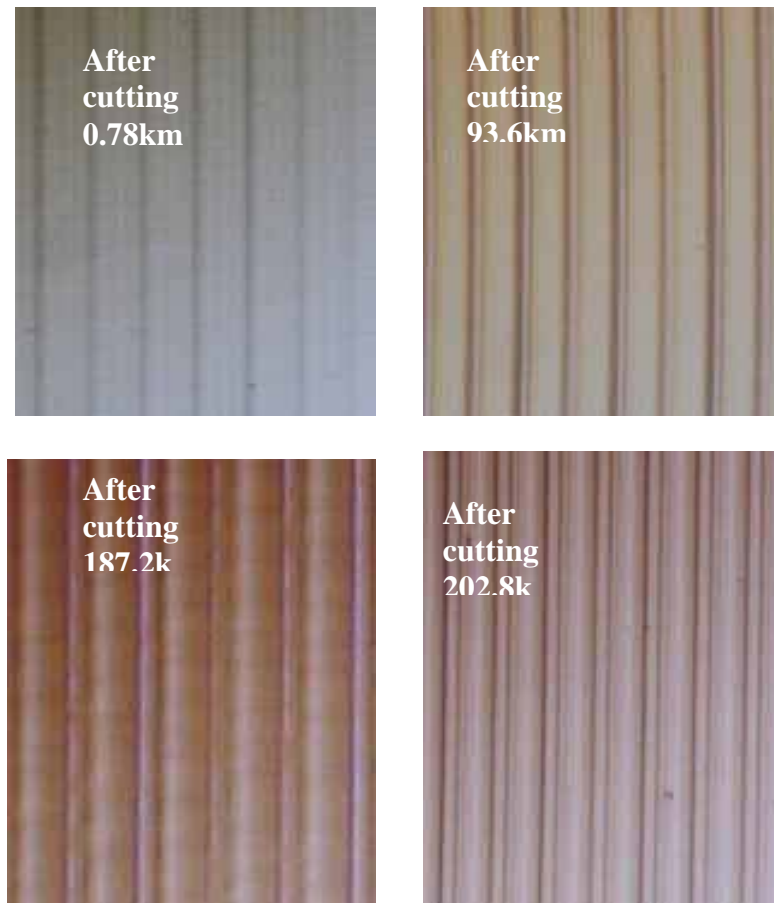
Surfaces machined by natural diamond cutter at different cutting distance.
